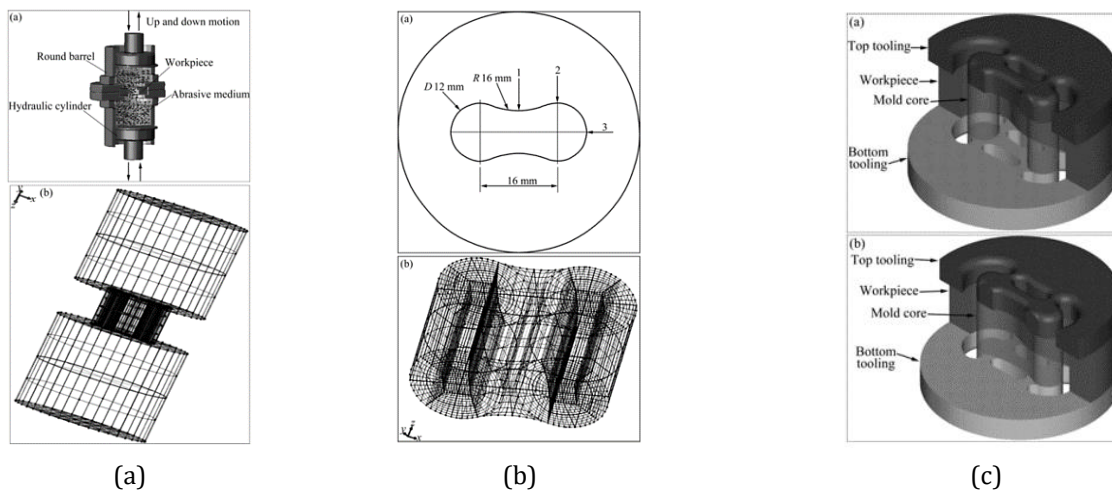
(a) AFM (b) Workpiece, and (c) Workpiece Assembly [31].
